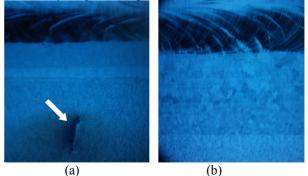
(a) Weld splatter (arrow) observed on the inner cavity surface near the equator electron beam weld in an as-received cavity. (b) Clean surface with effective weld splatter removal by using a light BCP etching prior to the heavy EP processing.
